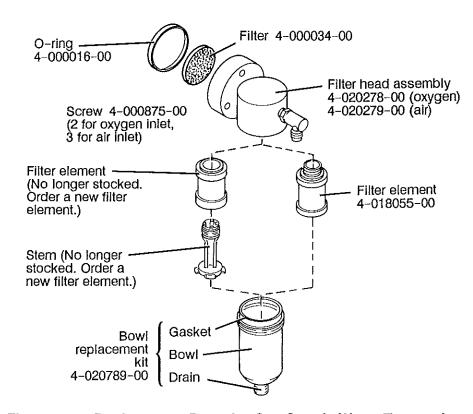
Replacement Parts for Gas Supply Water Trap and Filter Assembly (with screw-type drain)
